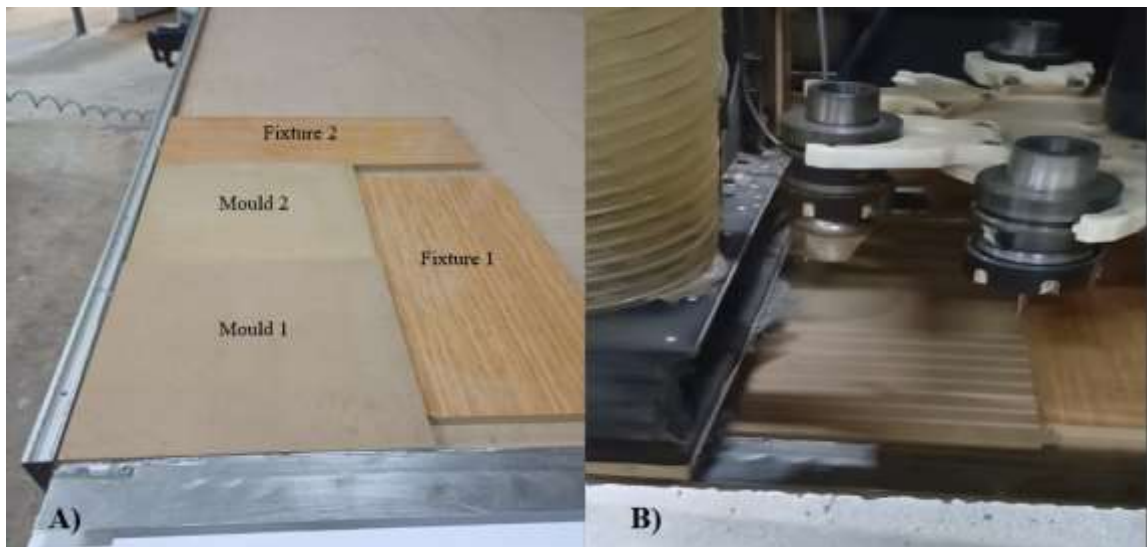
(A) Positioning of MDF mould and fixture plates, (B) Machining stage of channel geometries on the CNC Router bench
